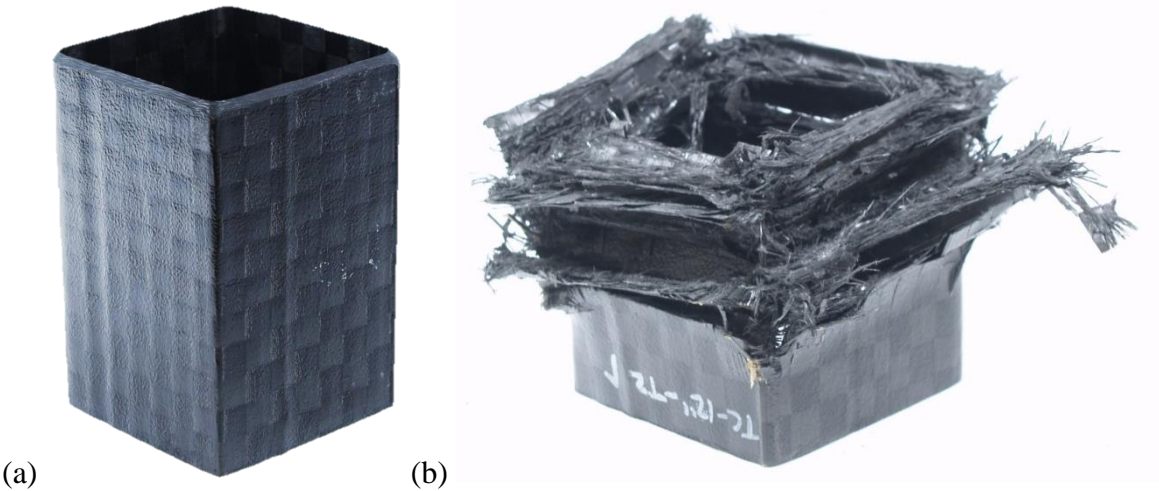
Square tube, specimen I, (a) before and (b) after crush testing.
